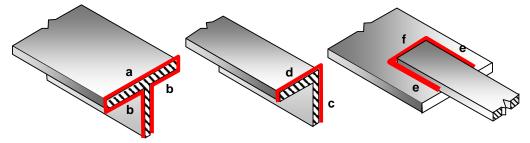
Weld Segments Subject to Variations of Enhancement Factor, *K* a – Beam flange outside, b – Beam flange inside, c – Channel web, d – Channel flange, e – Longitudinal lap weld, f – Transverse lap weld
